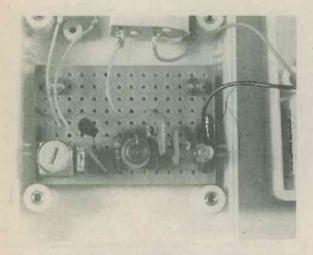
The calibrator components may be conveniently assembled on a small Veroboard panel
